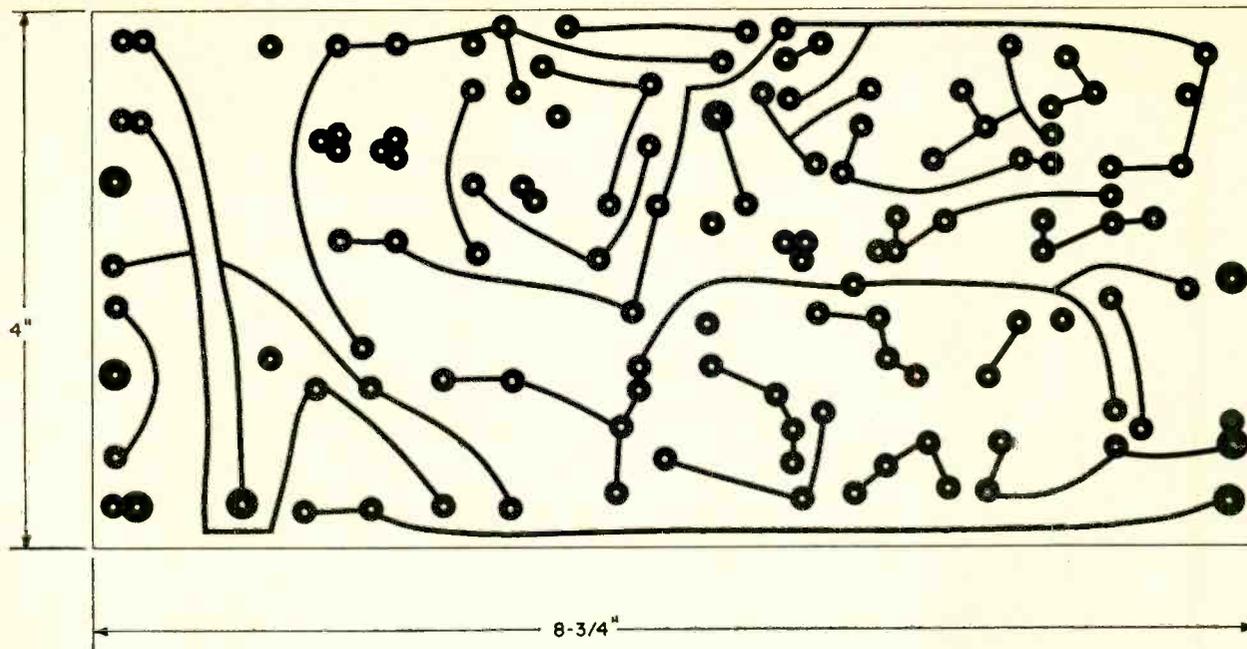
Use this pattern to make the printed board for Rhythm Lights. You will need a copper-clad board 9½" x 5½", a pint of etching liquid, 1/16" resist tape, 3/16" resist circles, and a plastic container in which to immerse the board for etching.
